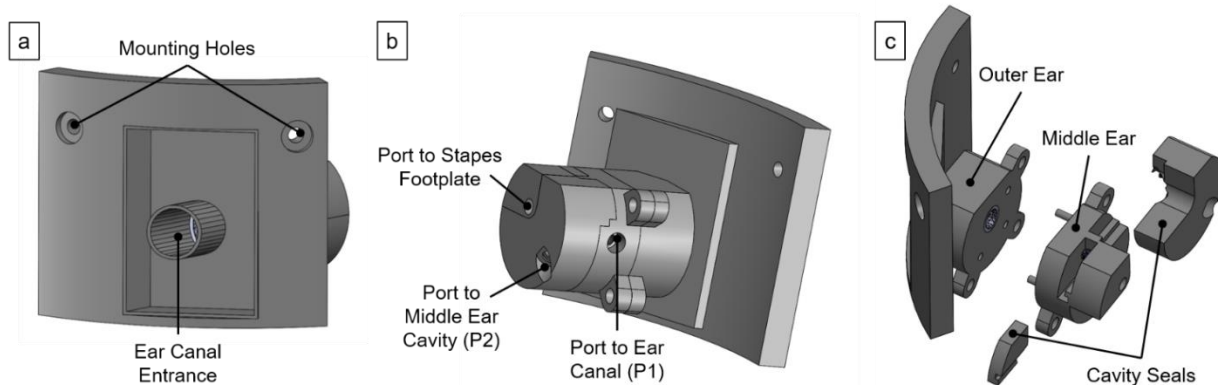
(a) Lateral view of the CAD model of the 3D printed TB highlighting the ear canal entrance. The model’s shape was designed to mount into the head block for blast exposure tests. (b) Medial view of the CAD model of the 3D printed TB. The pressure ports to the ear canal near the TM (P1) and middle ear cavity (P2) are shown where pressure sensors are threaded for measurements. A port for access to the stapes footplate for future studies is also shown. (c) Exploded view of the 3D printed TB’s CAD model showing the parts to be printed separately: outer ear, middle ear, and cavity seals.
